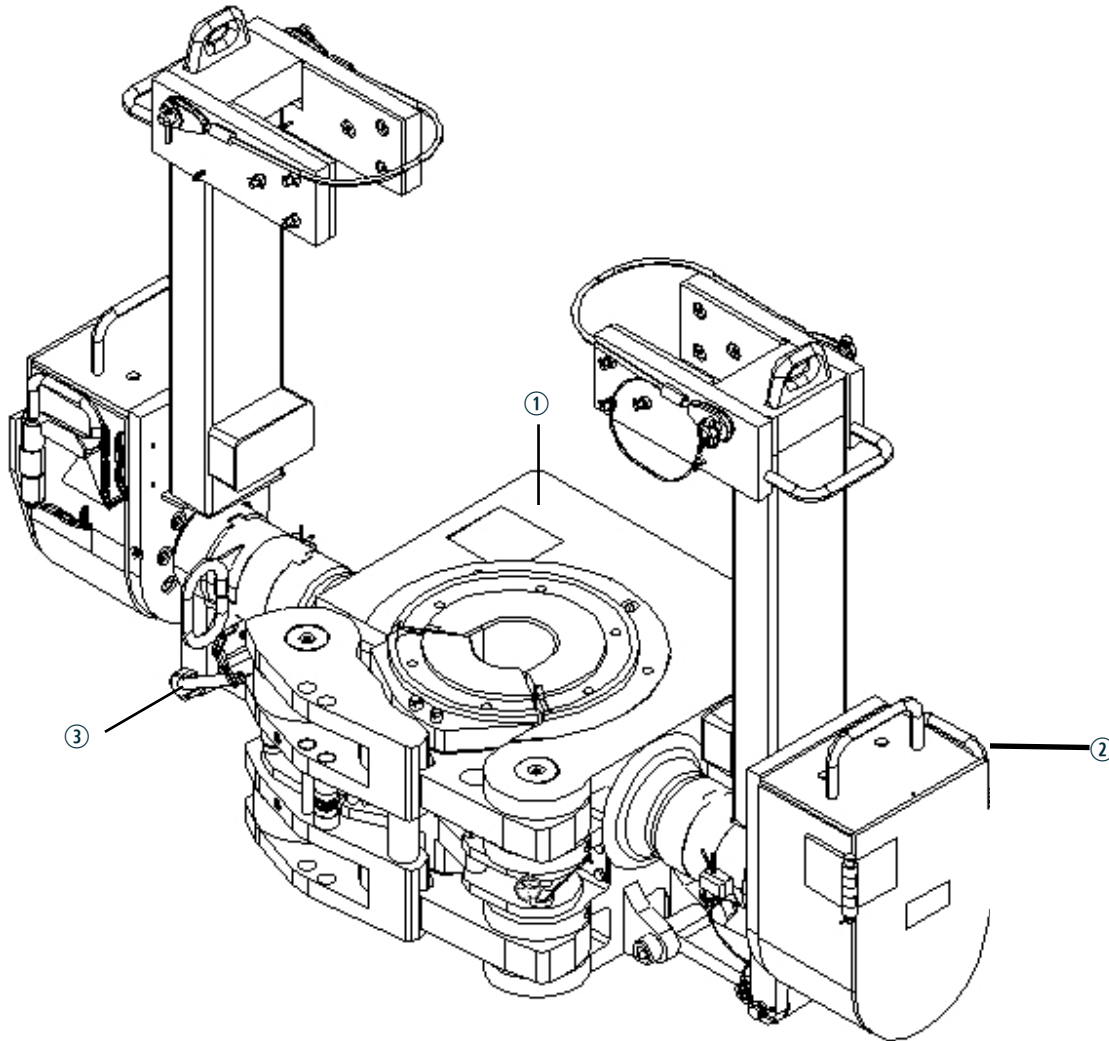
VES-SD 500-1 incl. adapter kit and Elevator Rotation System
